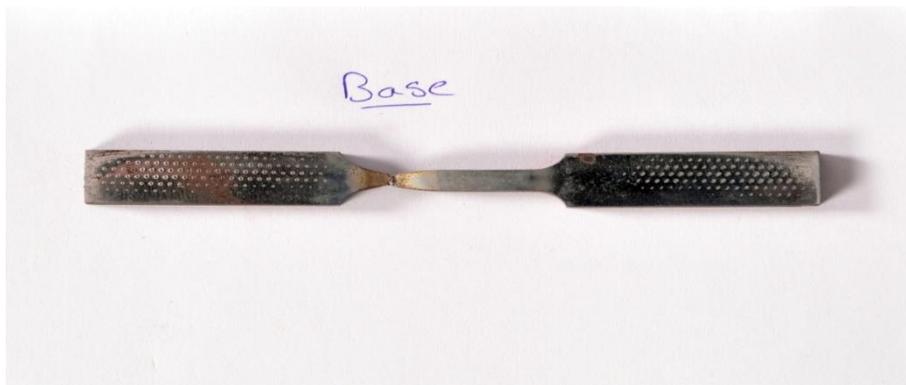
Failed tensile specimen of Base metal (DMR 249A)
